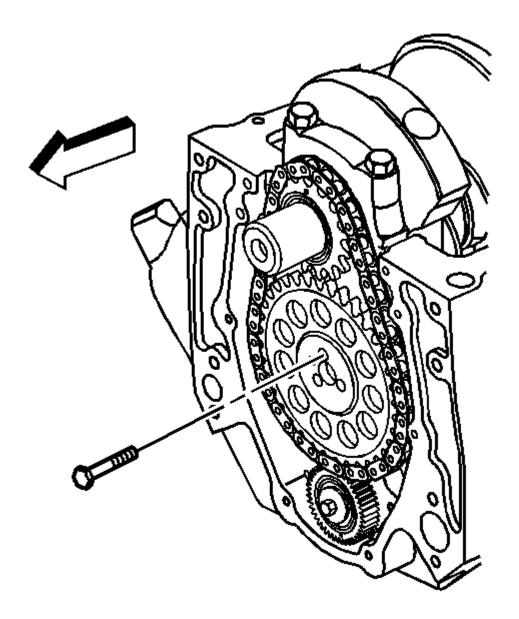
View Of Camshaft Sprocket Bolts Courtesy of GENERAL MOTORS CORP.
